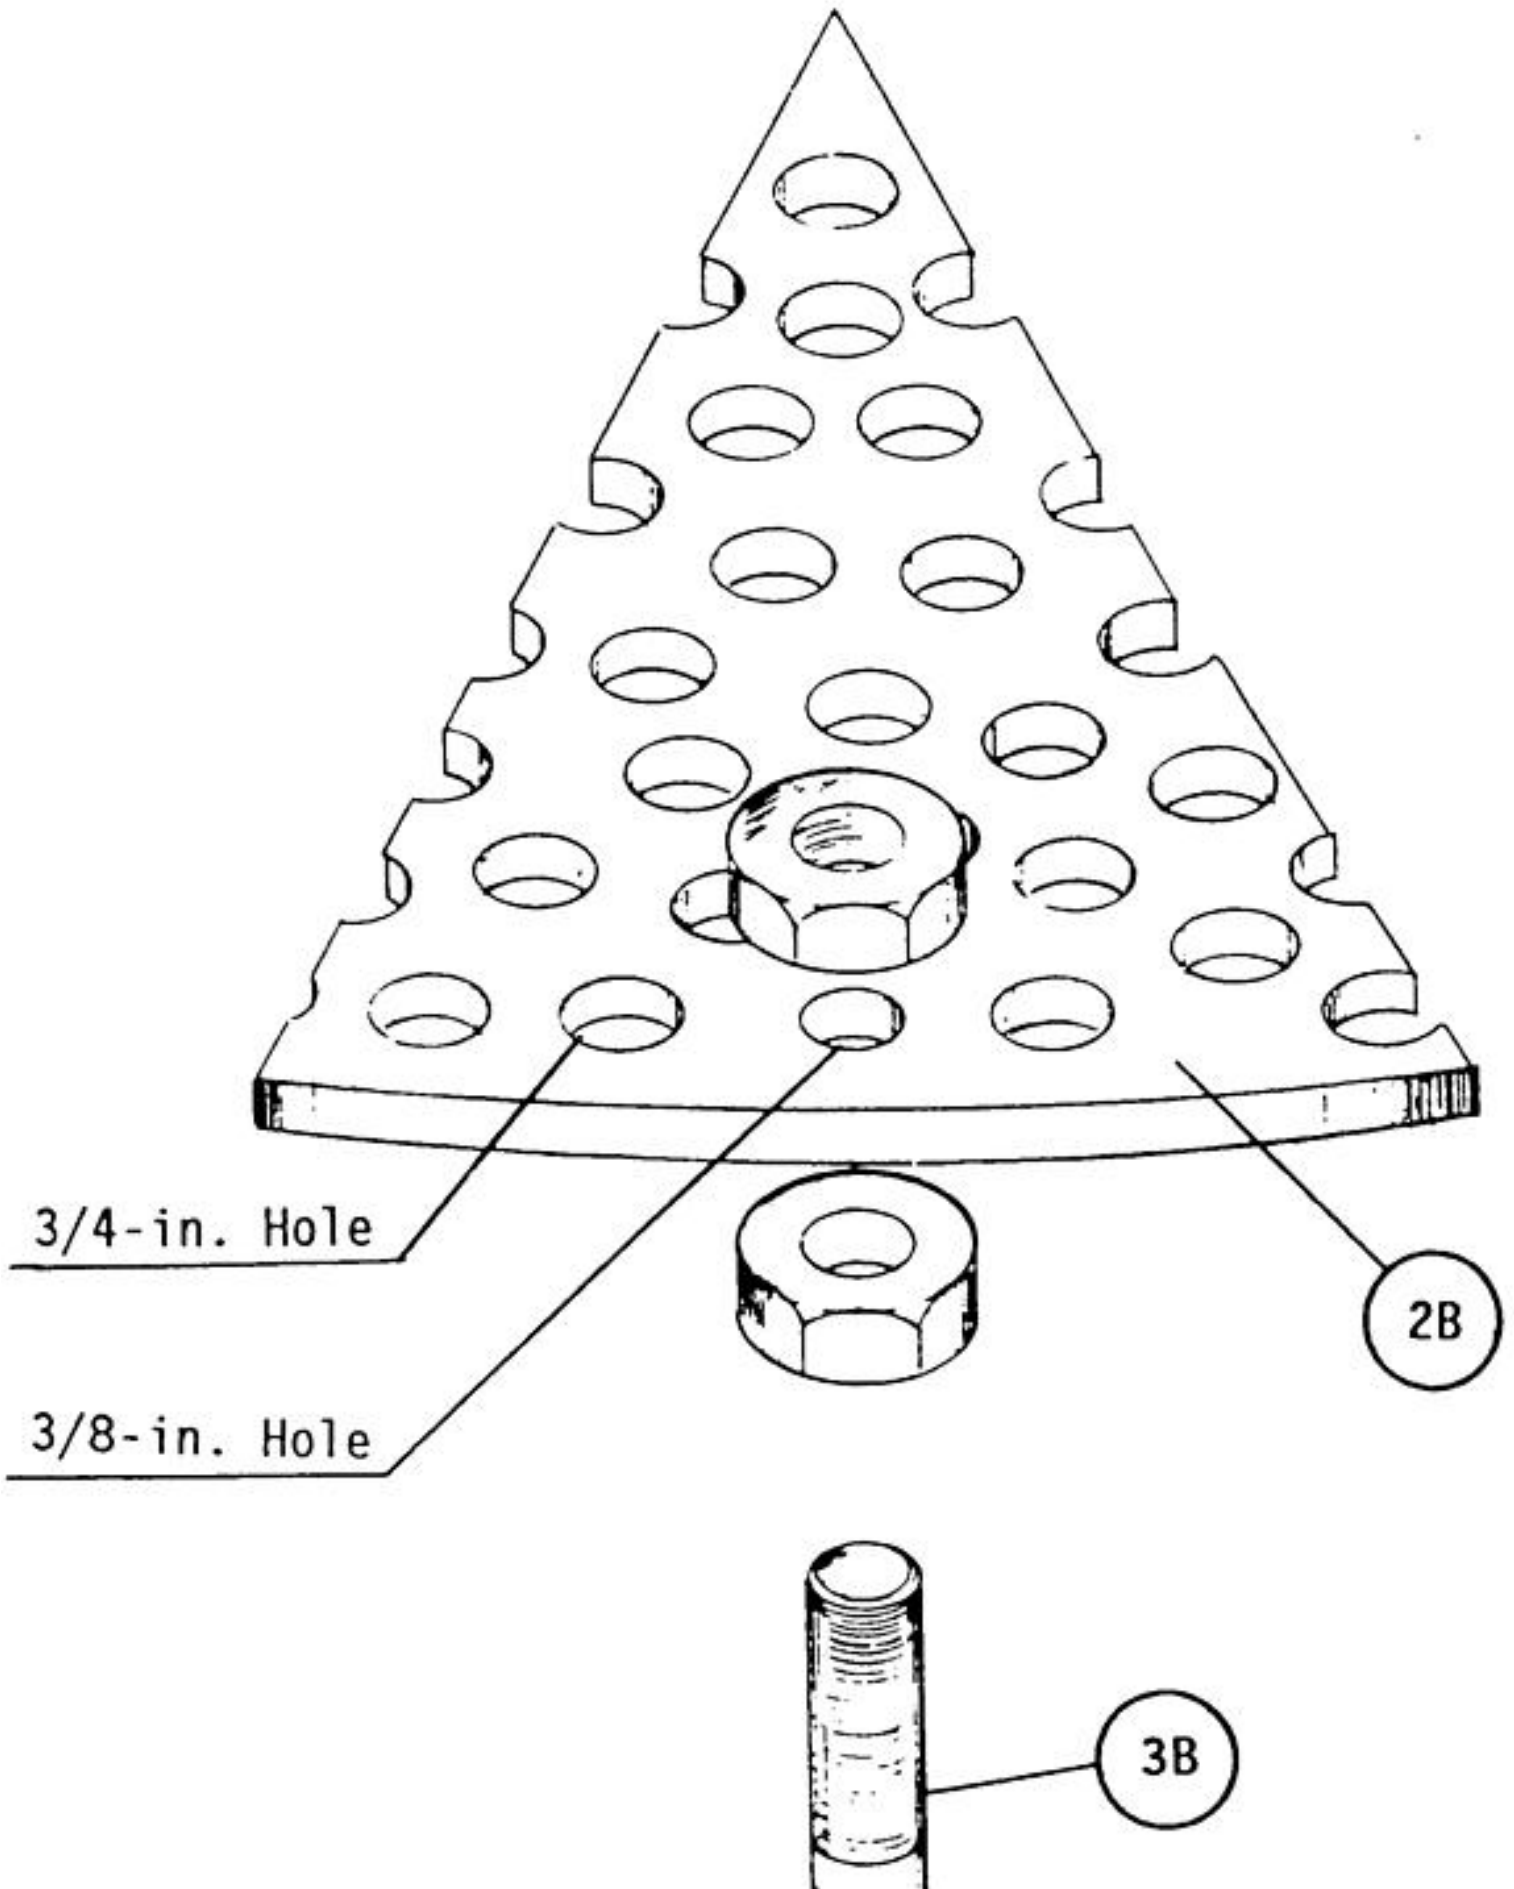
Exploded, schematic diagram of the filter unit.
